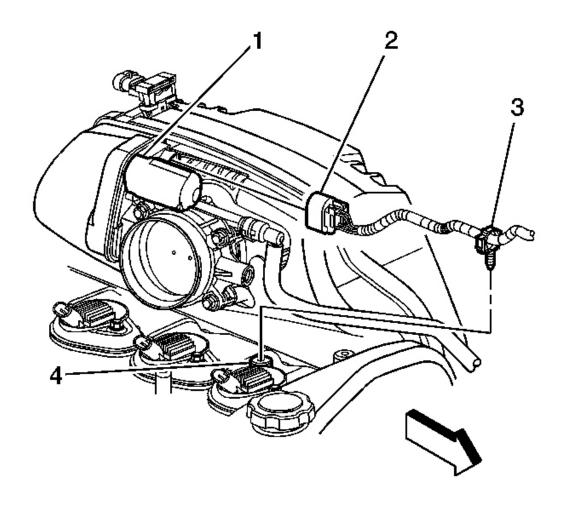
View Of Engine Wiring Harness Connections To Camshaft Cover & Throttle Body
